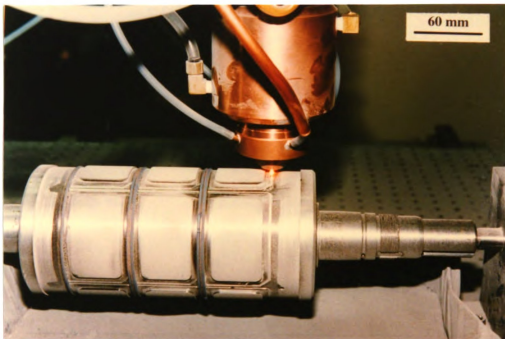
A view of the hard-facing tracks, directly deposited onto a AISI 1045 steel roller by laser cladding process.
